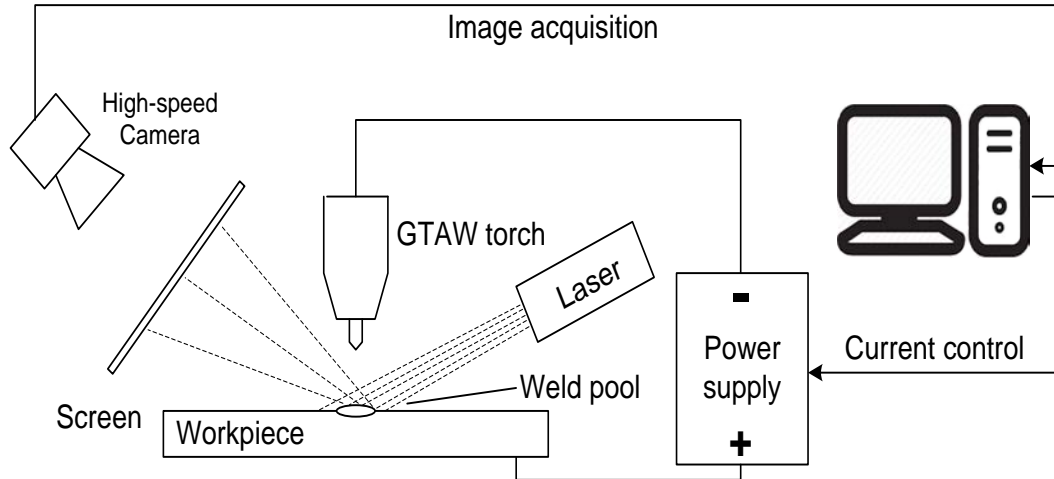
Schematic of the proposed weld pool penetration sensing system
